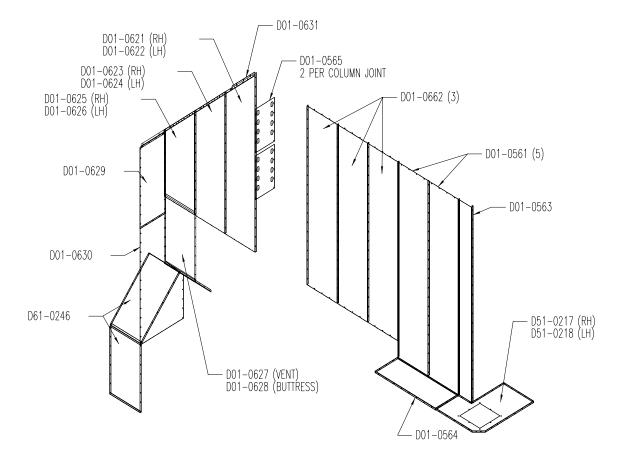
2022 and 2026 Inside Side Duct Assembly
